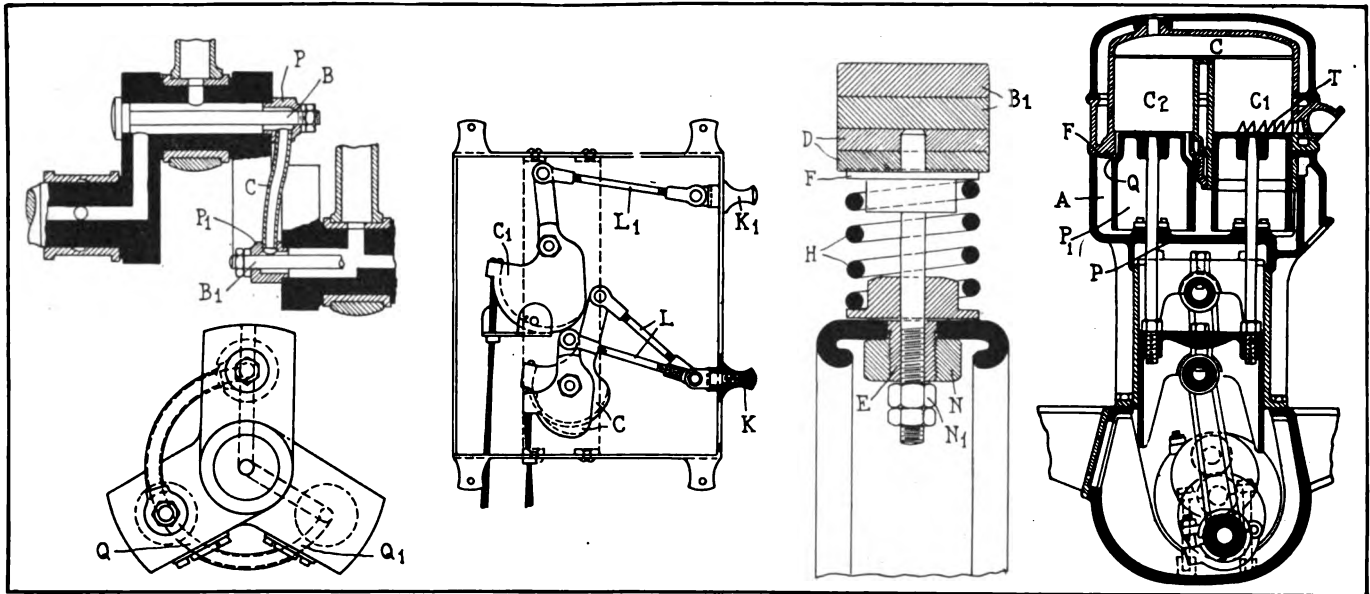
Delaunay-Belleville crankshaft lubrication. Fig. 15—Bowden control mechanism. Fig. 16—Sutcliffe coiled-spring automobile tire. Fig. 17—Giles twin-cylinder automobile engine
